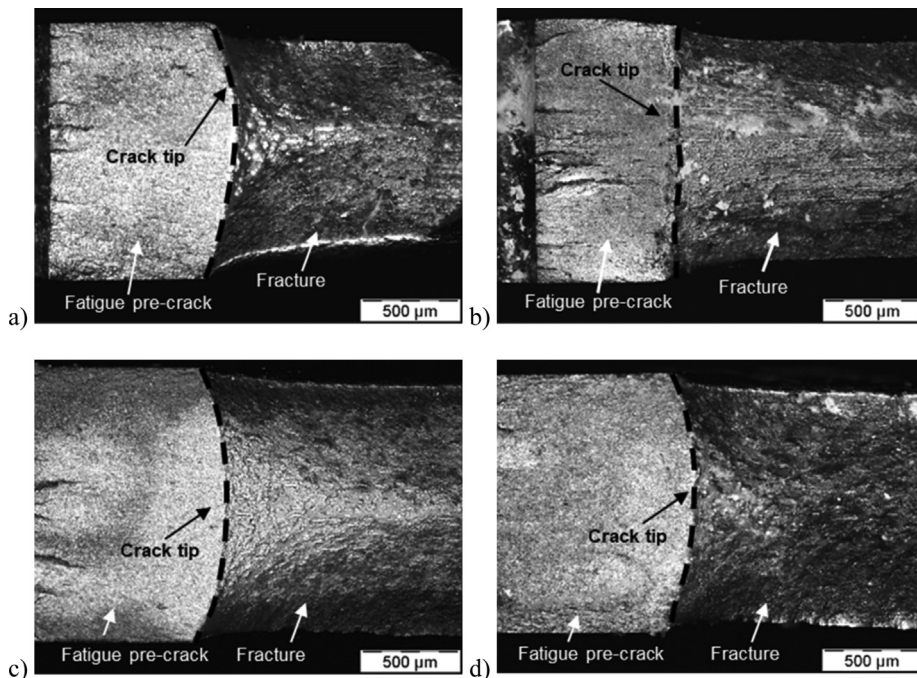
Fracture surface of DENT specimens: (a) CP (b) DP (c) TBF (d) Q&P.
